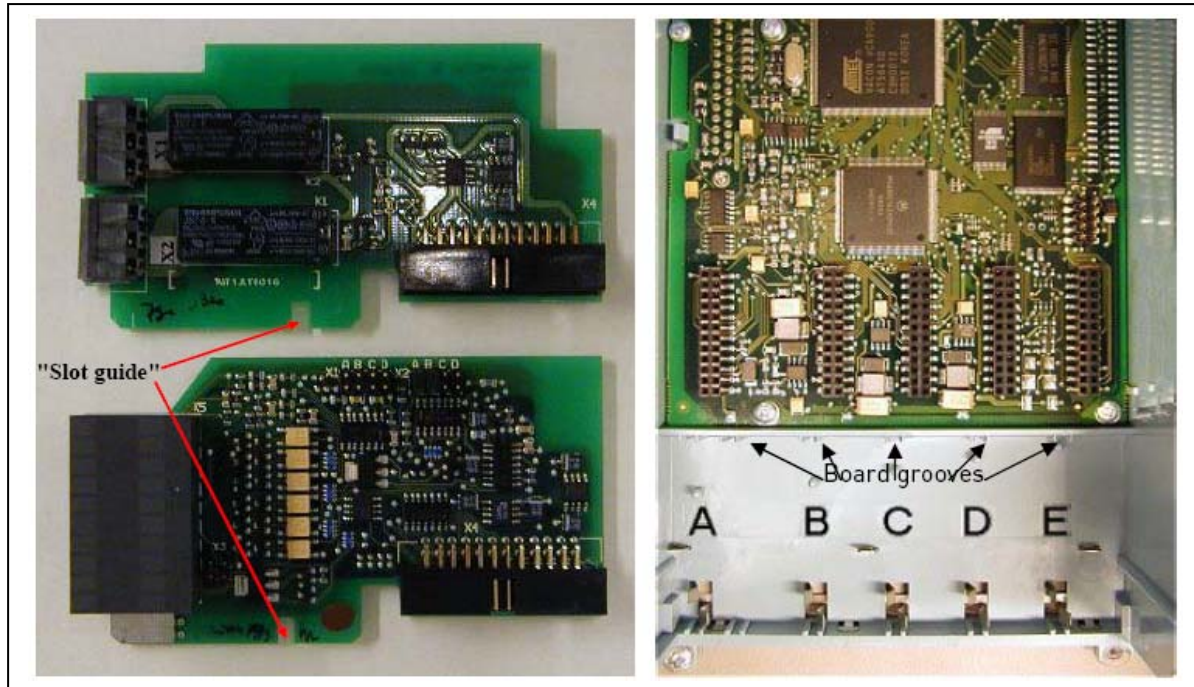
Board Guide to Prevent Incorrect Mountings
